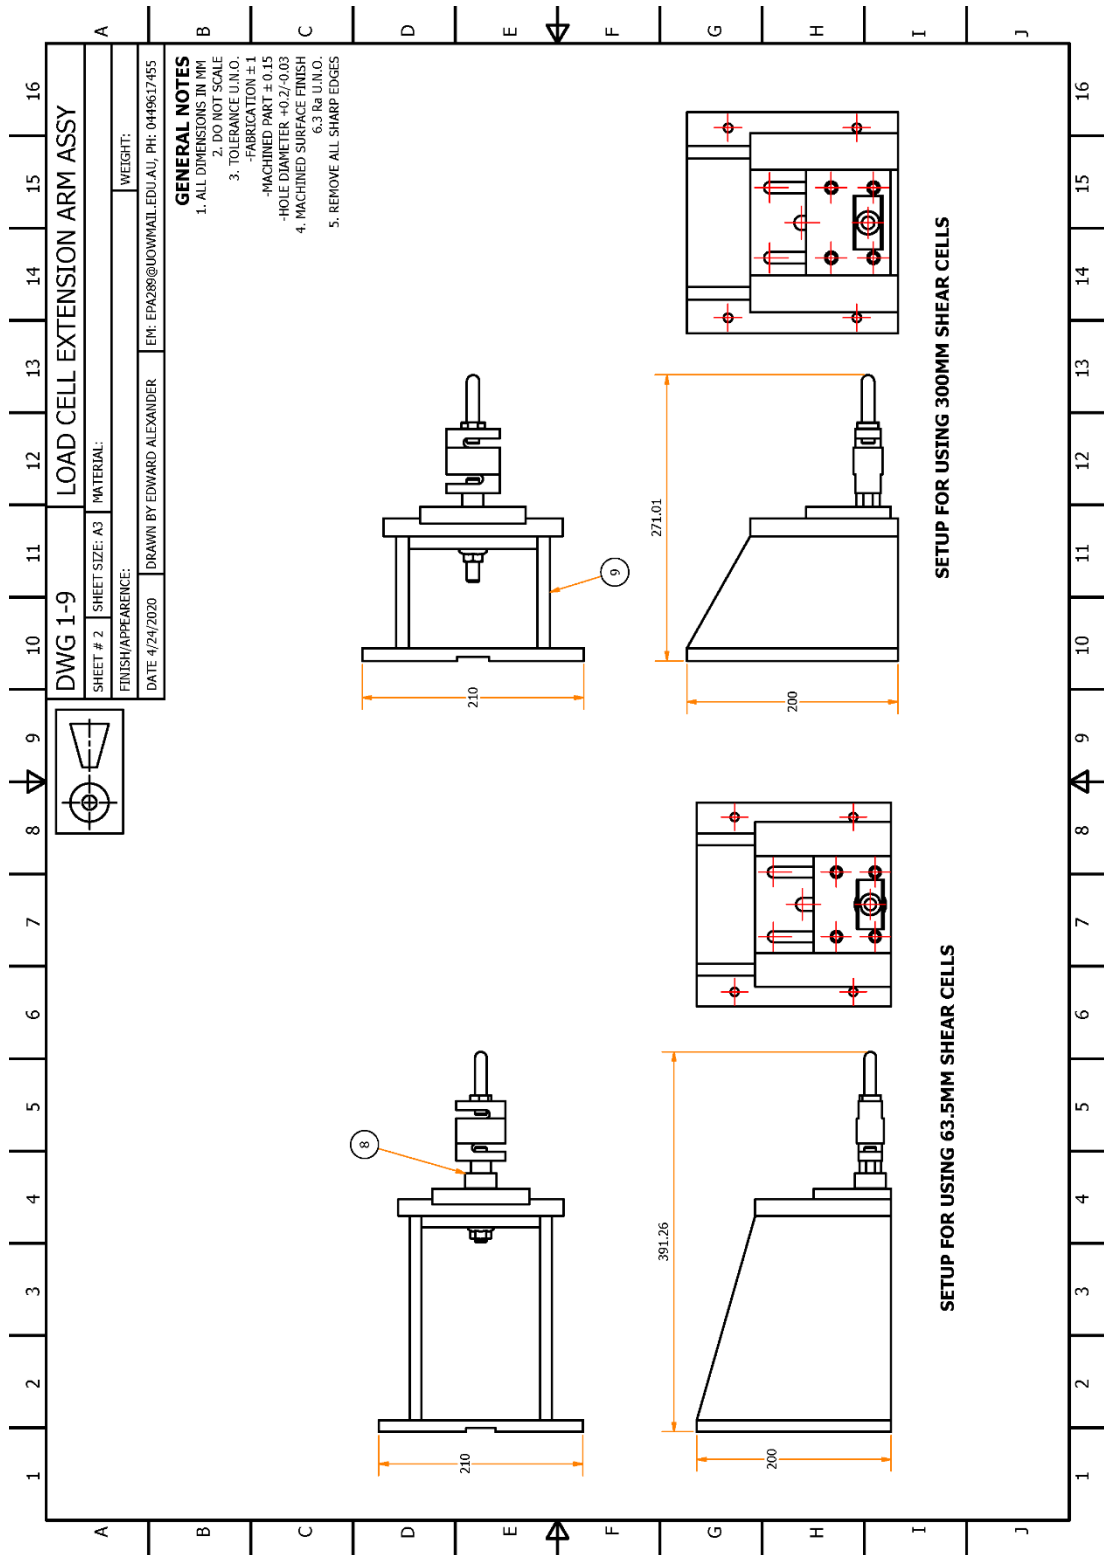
Load cell extension arm assembly drawing – sheet 2 - configurations
